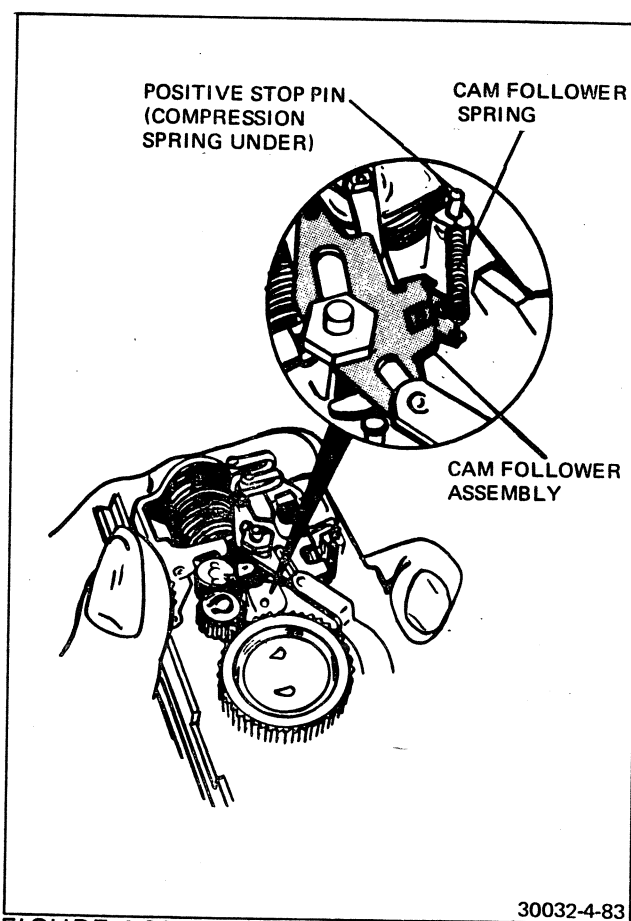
CAM FOLLOWER ASSEMBLY, POSITIVE STOP PIN & SPRING
